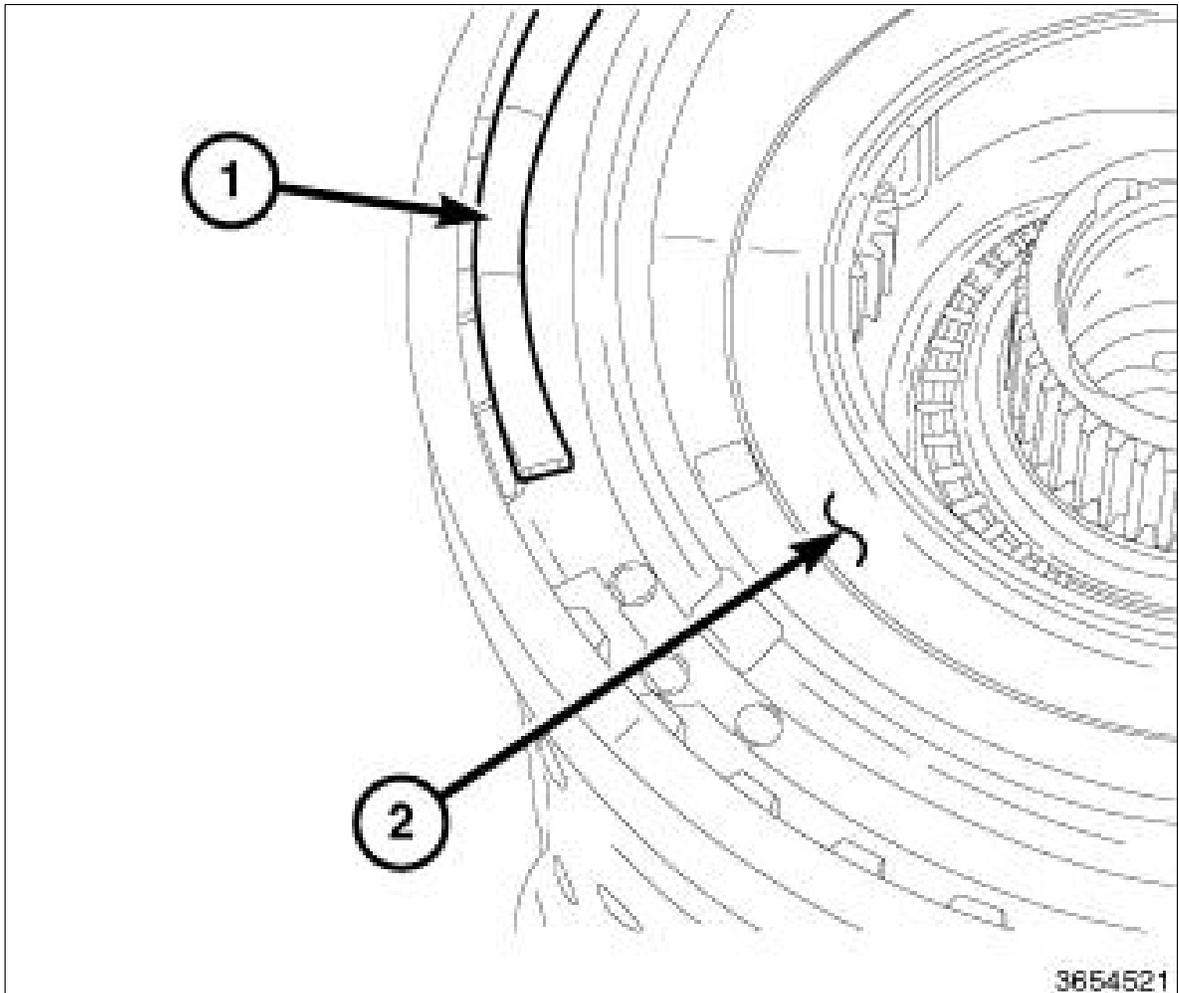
P4 Sun Gear/C/E Clutch Retainer & D-Clutch Drum
